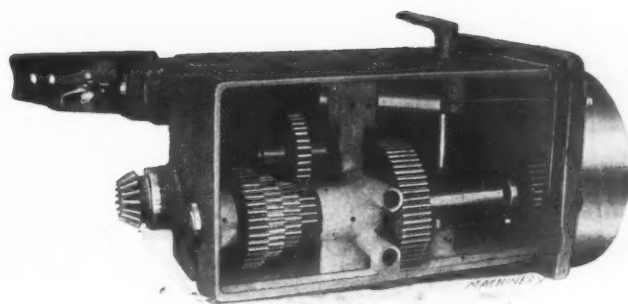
Type of Gear-box used on Both Spacing and Drilling Machines
